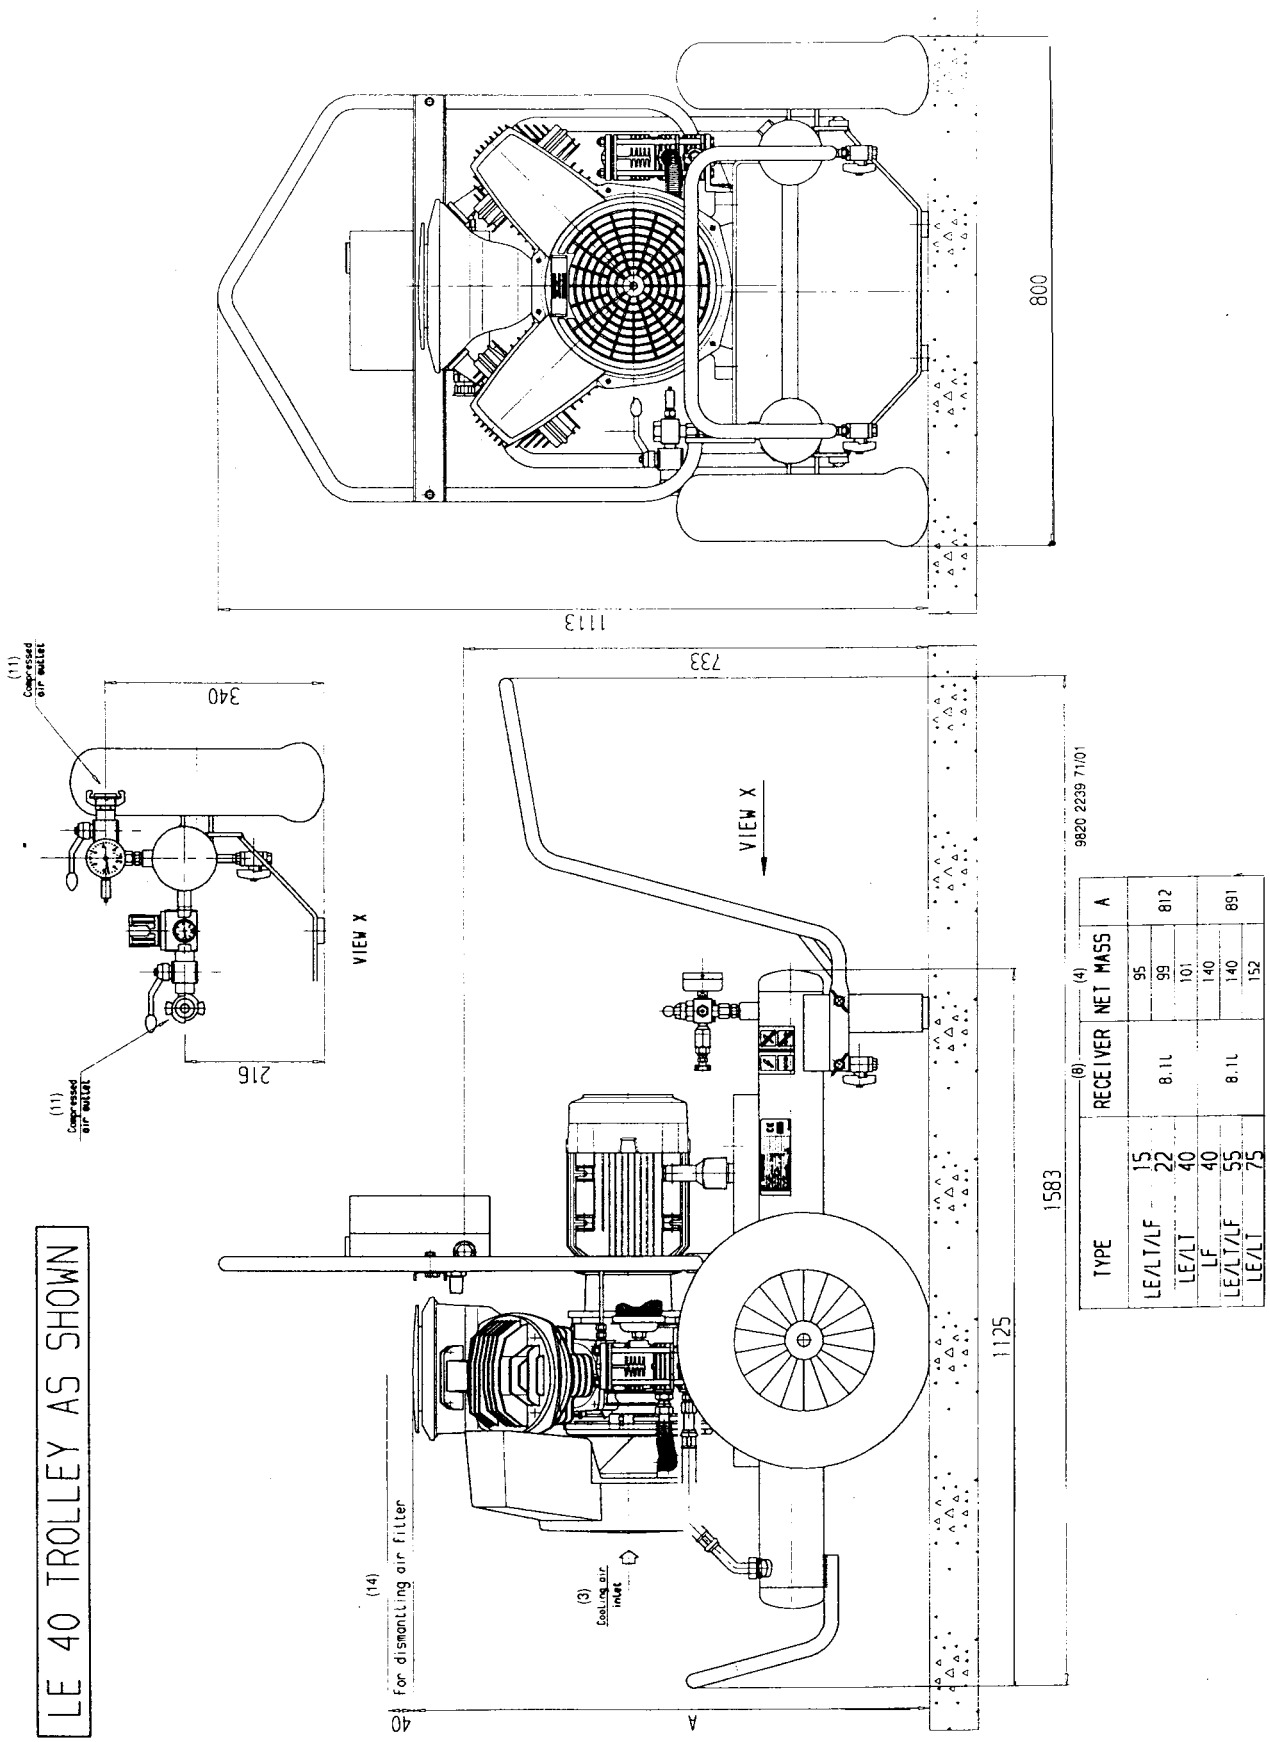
Dimension drawing, LE/LF/LT Trolley with electrical motor
